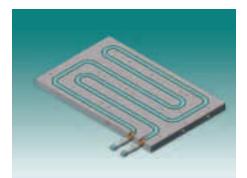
Typical copper tube embedded in aluminum plate heatsink design.
